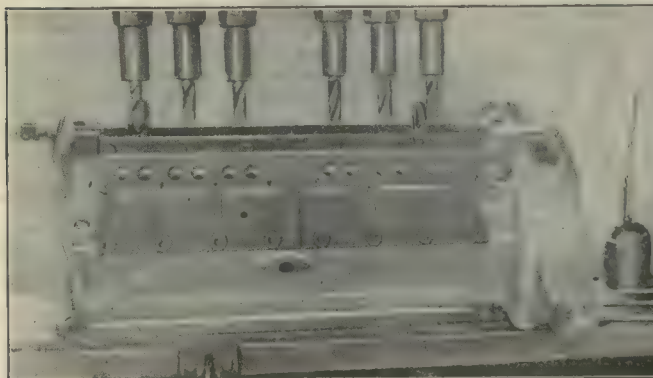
DRILLING VALVE-TAPPET GUIDE HOLES
